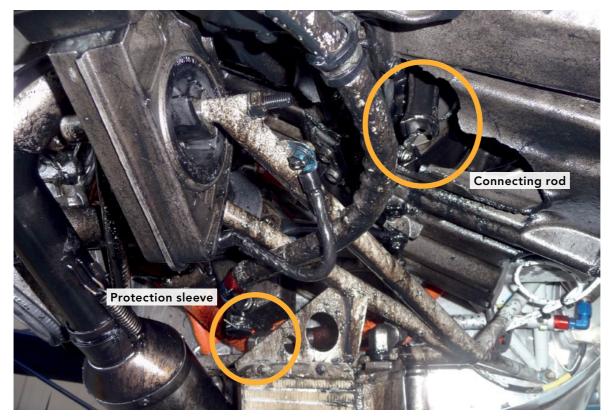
Lower left hand side engine. (Source: Wings over Holland)
